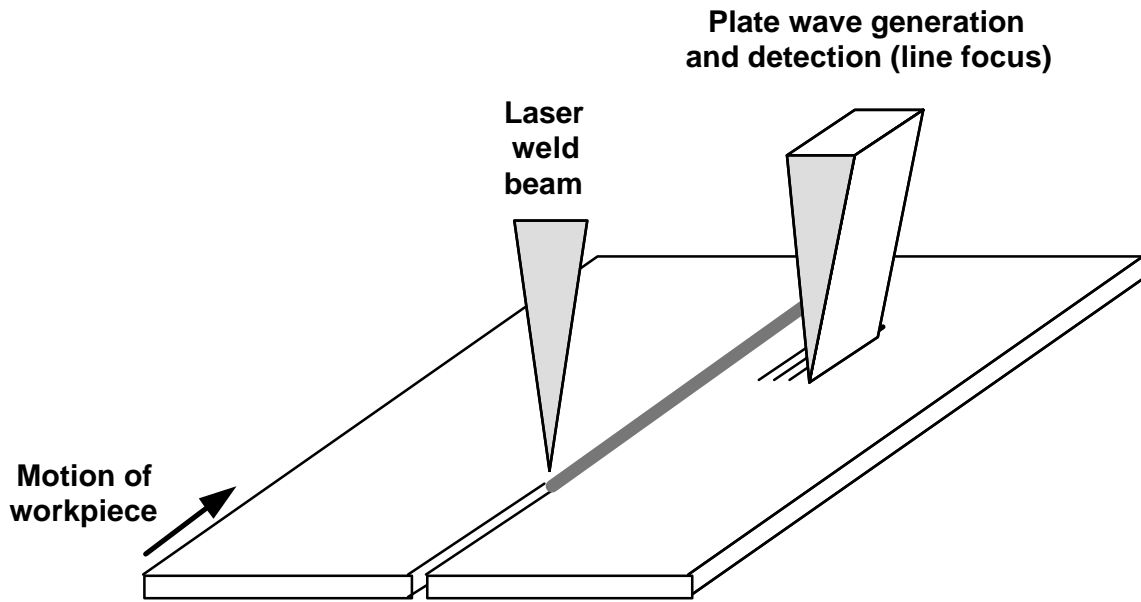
Schematic diagram of weld inspection geometry using reflected plate waves. The gap between the sheet metal panels is exaggerated.
